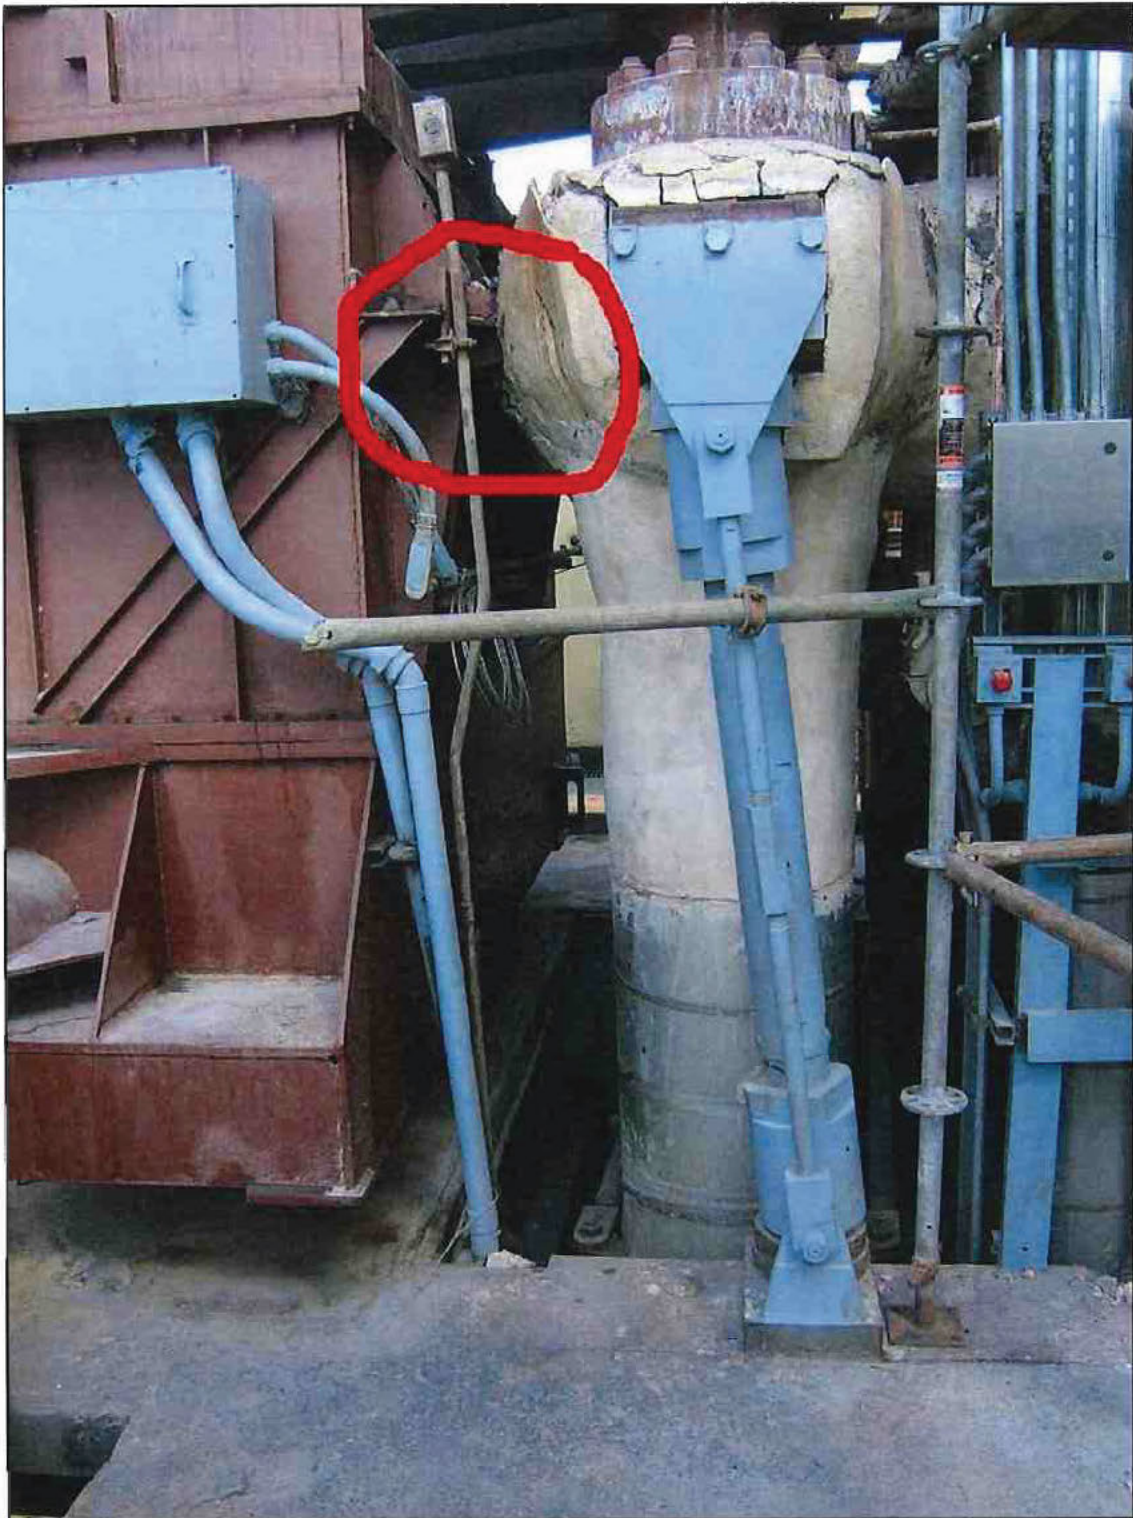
U-6 MS Control Valve Actuator Assembly Connection to Steam Chest
